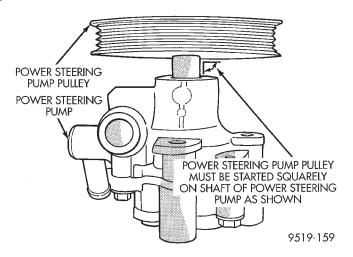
Pulley Positioned On Shaft Of Power Steering Pump
